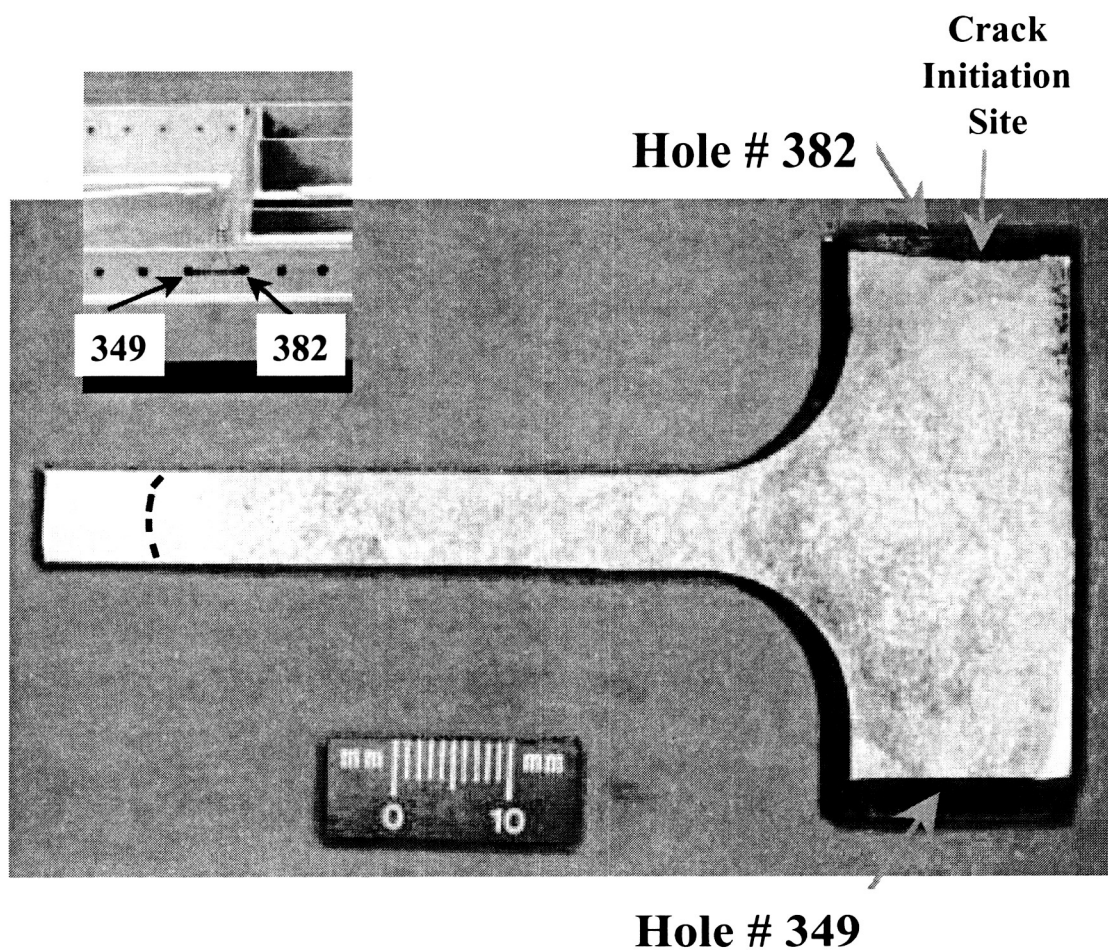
The photograph shows the surface of the crack emanating from fastener hole #382 and propagating into hole #349 and the forging web. The location of fastener holes #349 and #382 is shown in the small photograph. The dashed line shows the final crack front in the forging web.
